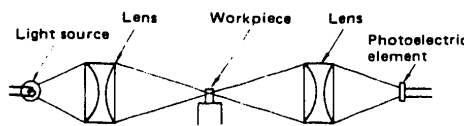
Photoelectric Inspection of Small Workpieces
